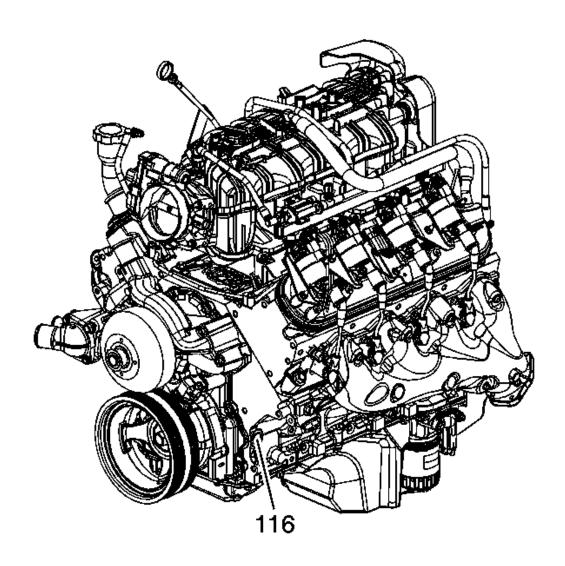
View Of Engine Block Left Front Oil Gallery Plug Courtesy of GENERAL MOTORS CORP.
